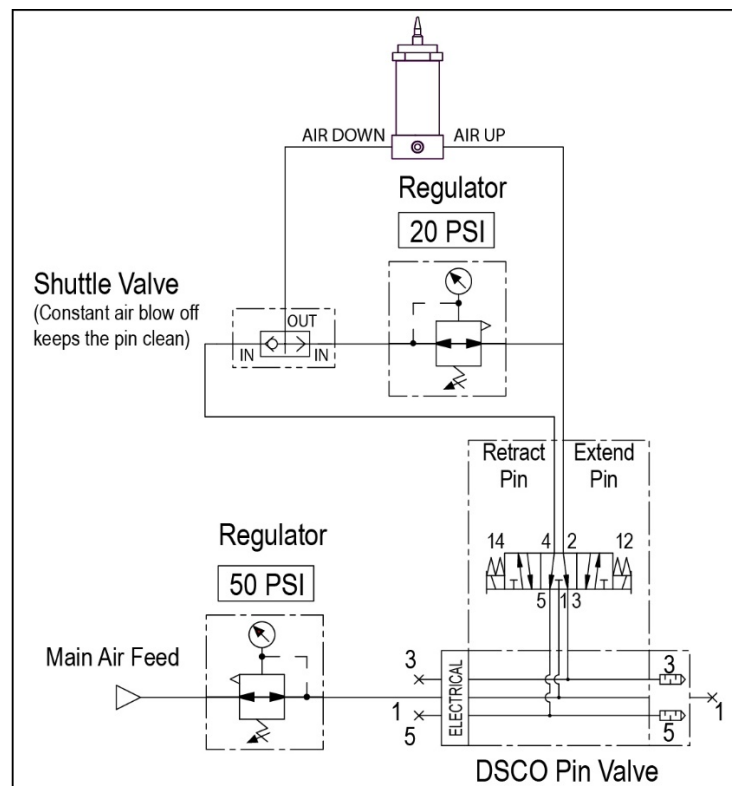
Pneumatic Connection Diagram for LVDT Weld Body with Retractable Pin, using DSCO Valve (Not applicable to Clamp Mount Assembly)
